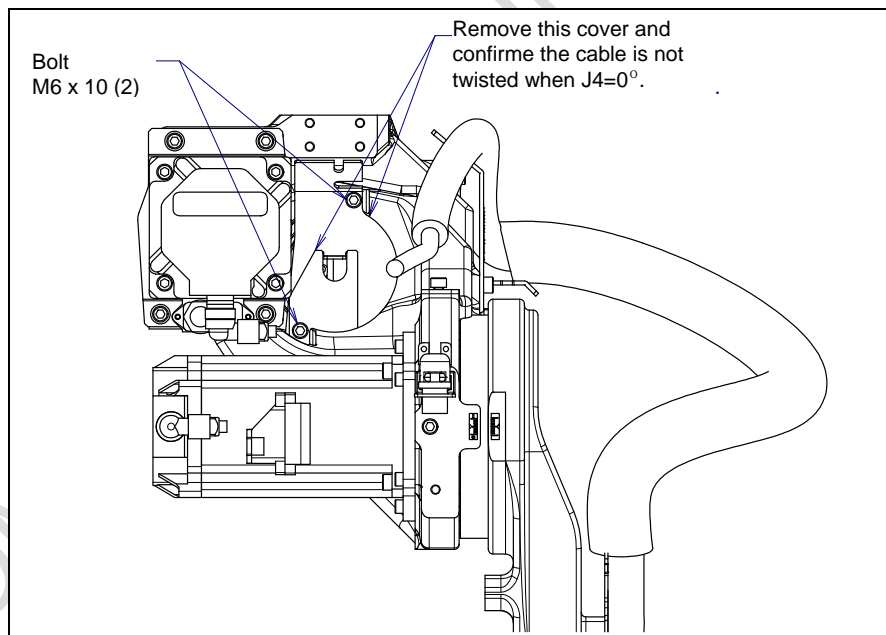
(a) Confirming the state of cable (J4-axis)
